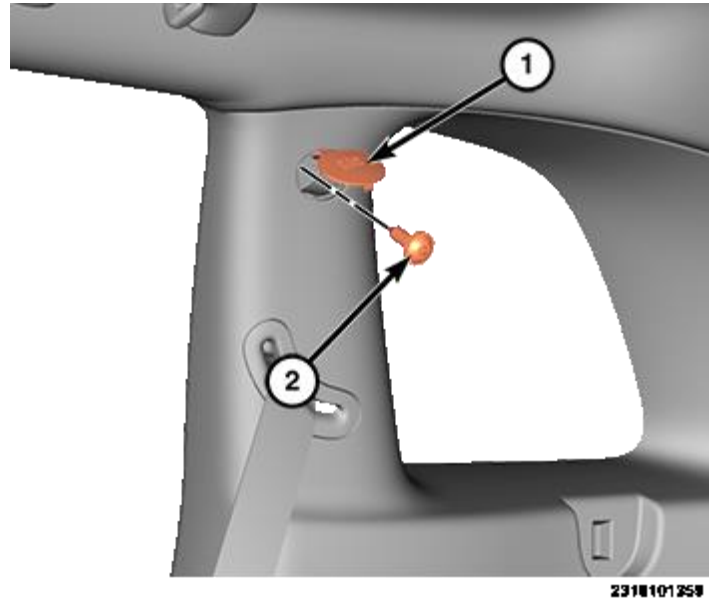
Upper Quarter Trim Panel Screw and Cover (Passenger Side Shown, Driver Side Similar)
